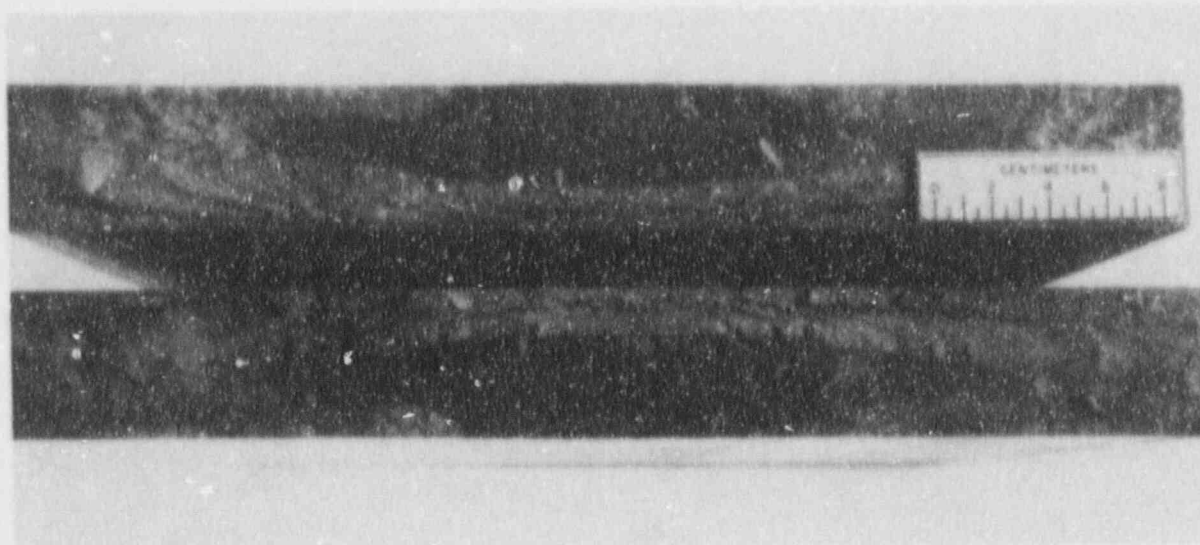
Macrograph of the fracture surface of clad plate CP-15.
